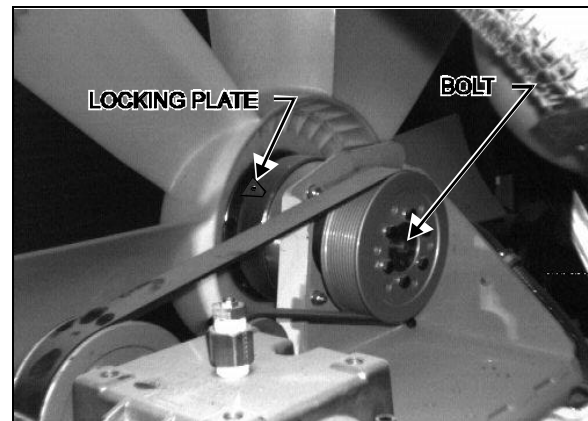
MECHANICAL LOCKING DEVICE 05033
